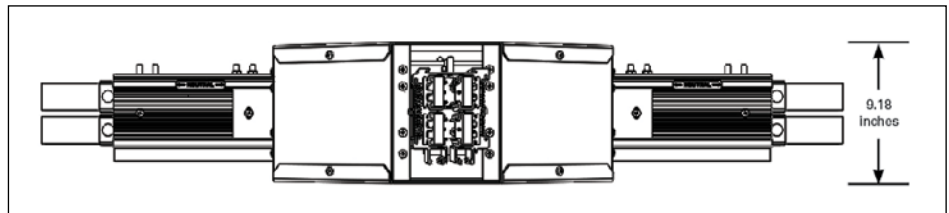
600–1000 A Tee (TE-LI) Front View
